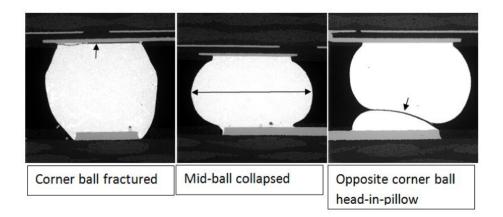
Typical defects in solder balls due to assembly-induced package warpage (Courtesy of SEM Lab, Inc.)
